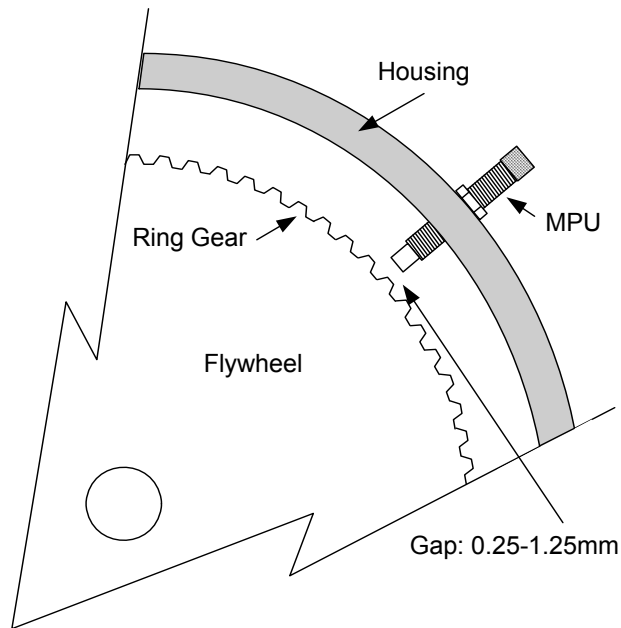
Magnetic Pickup Mounting in Flywheel Housing
